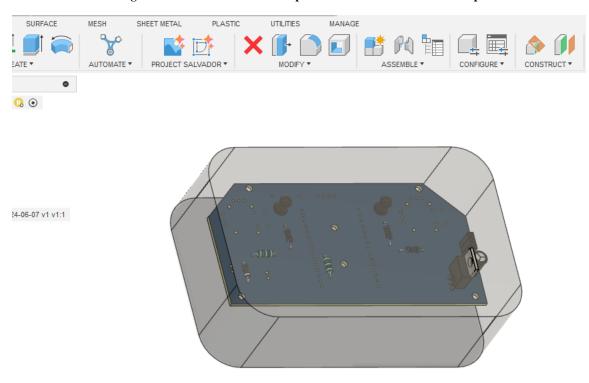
3D Model of Joystick Case after Encompassing PCB in it
